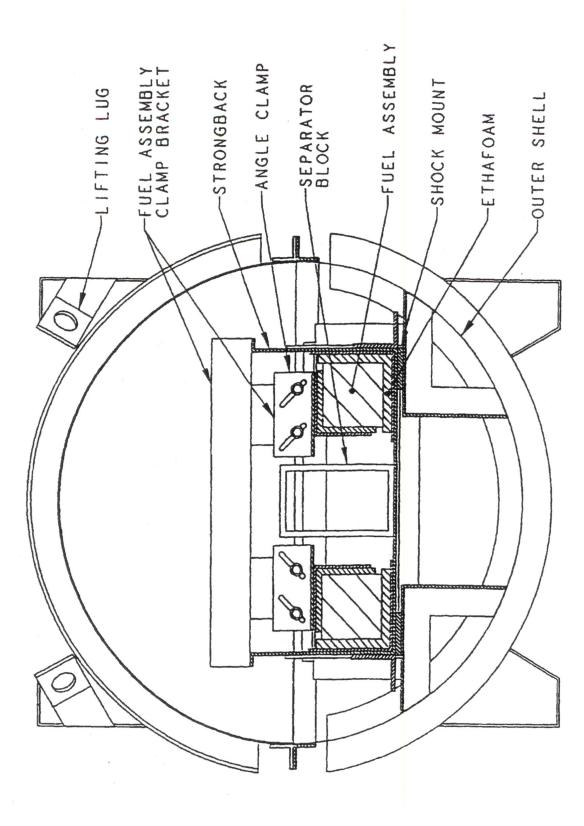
Typical unirradiated fuel package cross section with fuel assemblies
